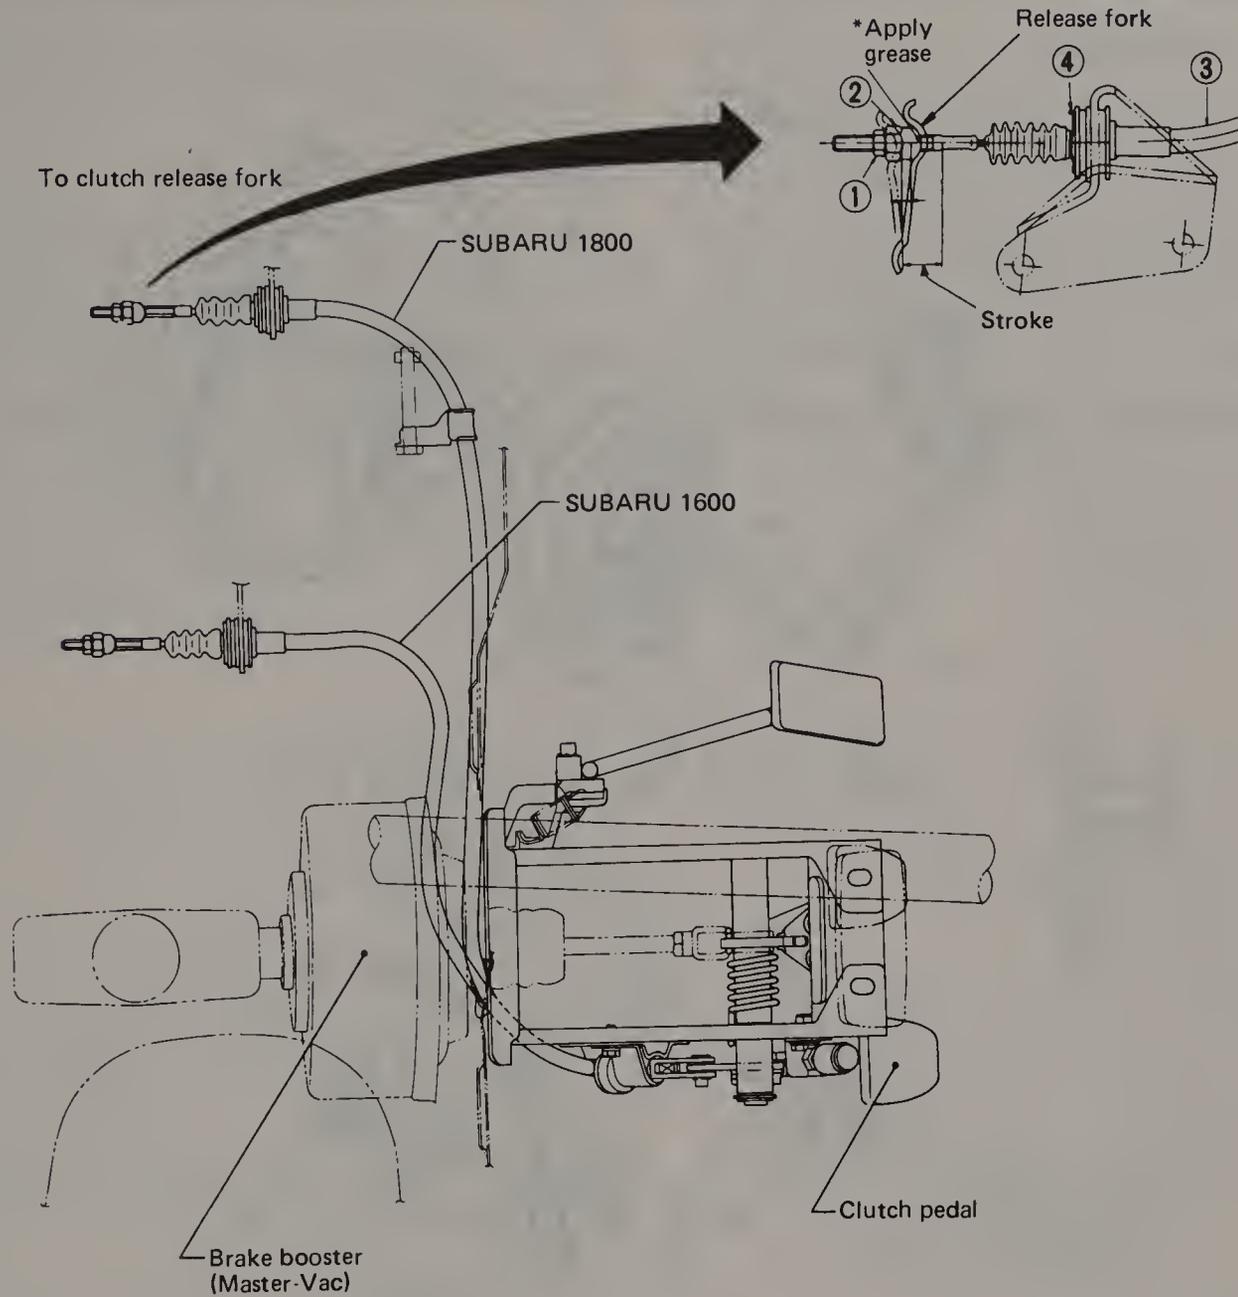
Clutch cable location in the engine compartment (Sec 2)
